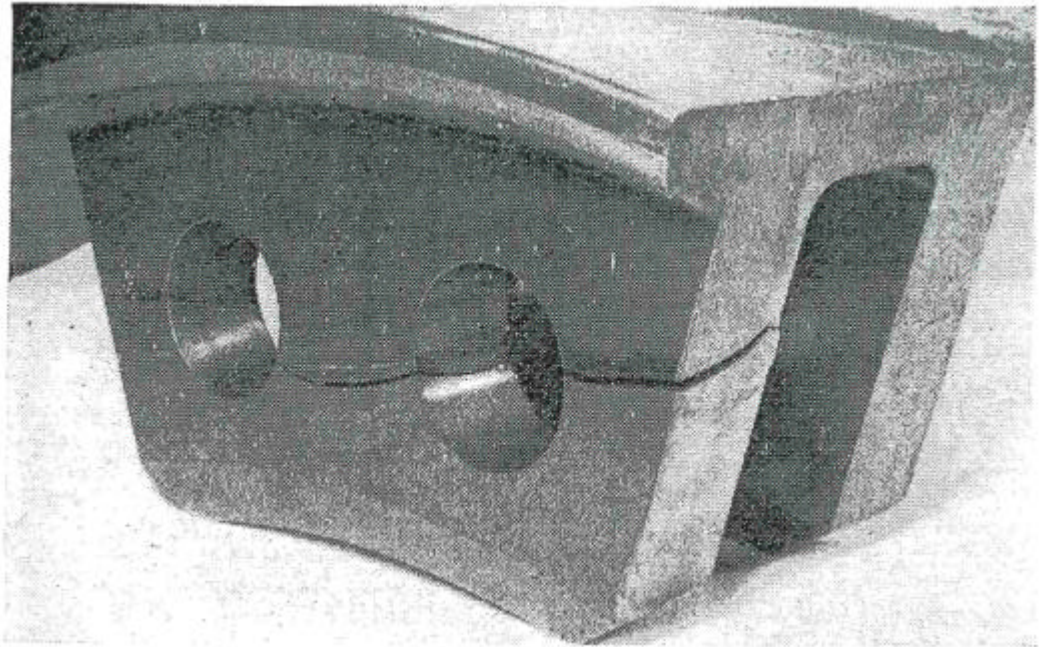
Damaged inlet guide vane ring of Magnox gas circulator
